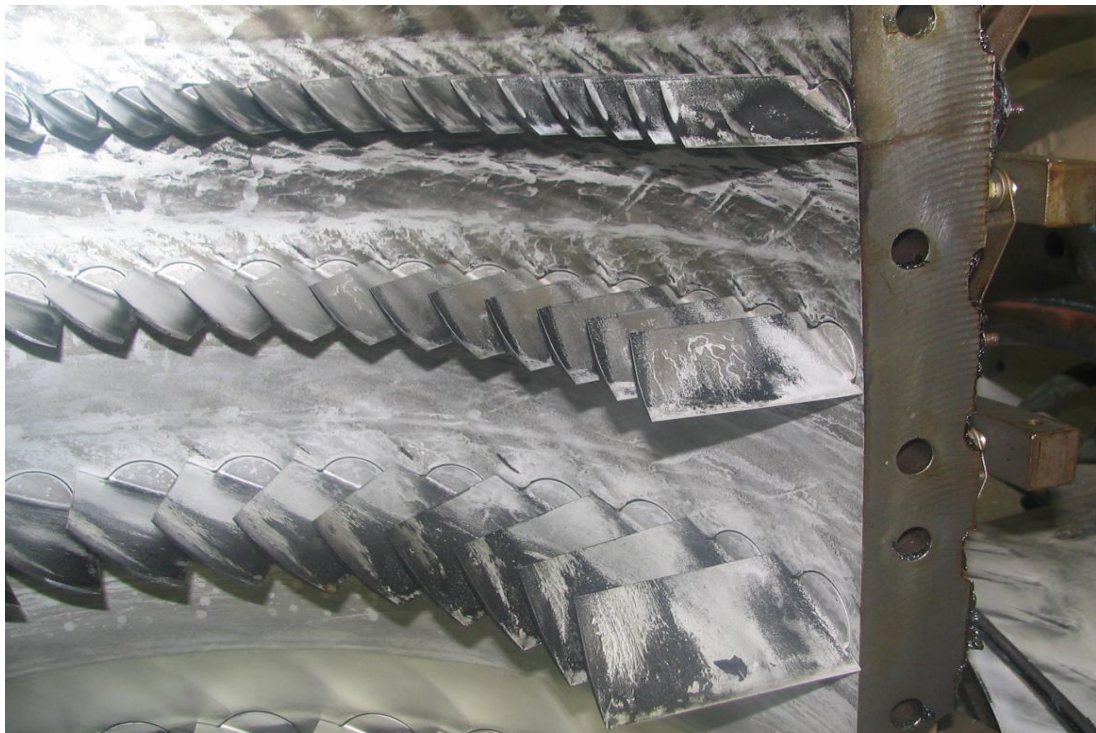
H. Fouling deposition and blade damage [Ref. 60]
